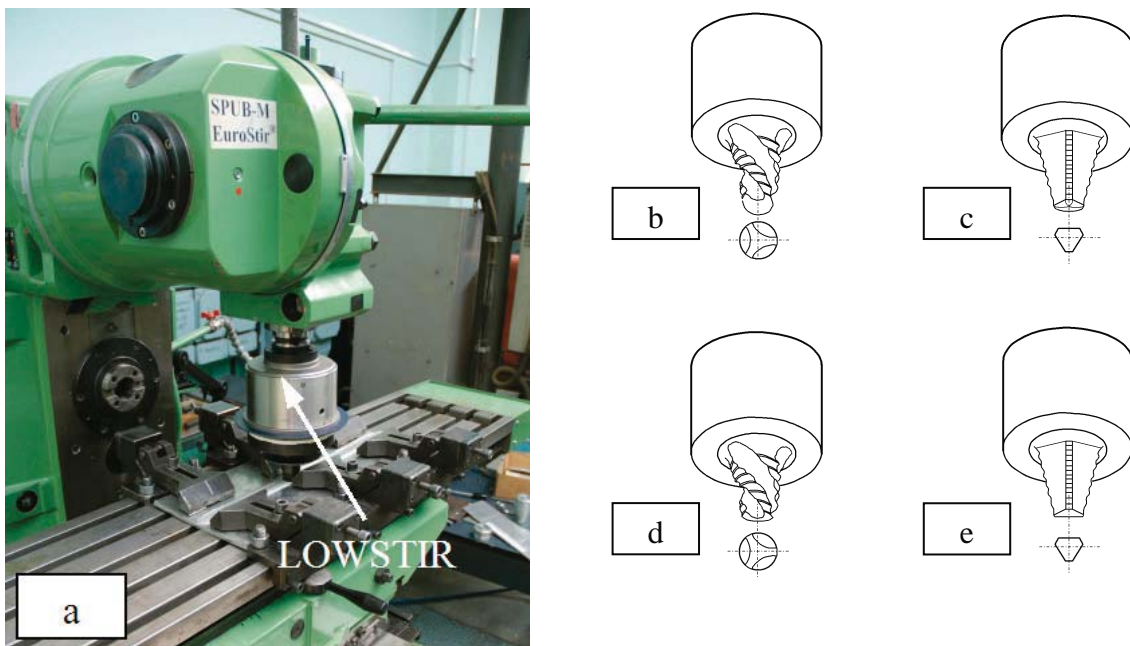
The welding stand a) built on the base of the milling machine FYF 32JU2 equipped with LOWSTIR device with tools b) - e). See Table 1
